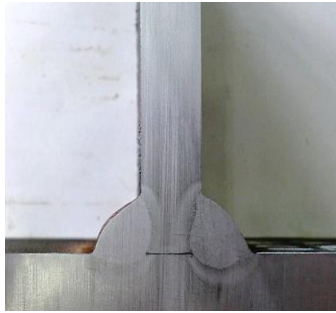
Weld toe condition after bending test for 10 mm thickness
